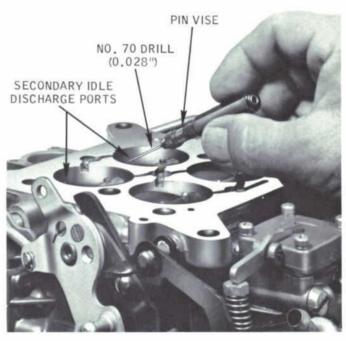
Secondary Idle Discharge Ports Enlargement — Holley 4-V Carburetor
